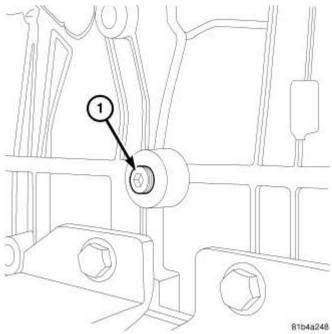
CRANKSHAFT LOCK PLUG LOCATION Courtesy of CHRYSLER LLC
